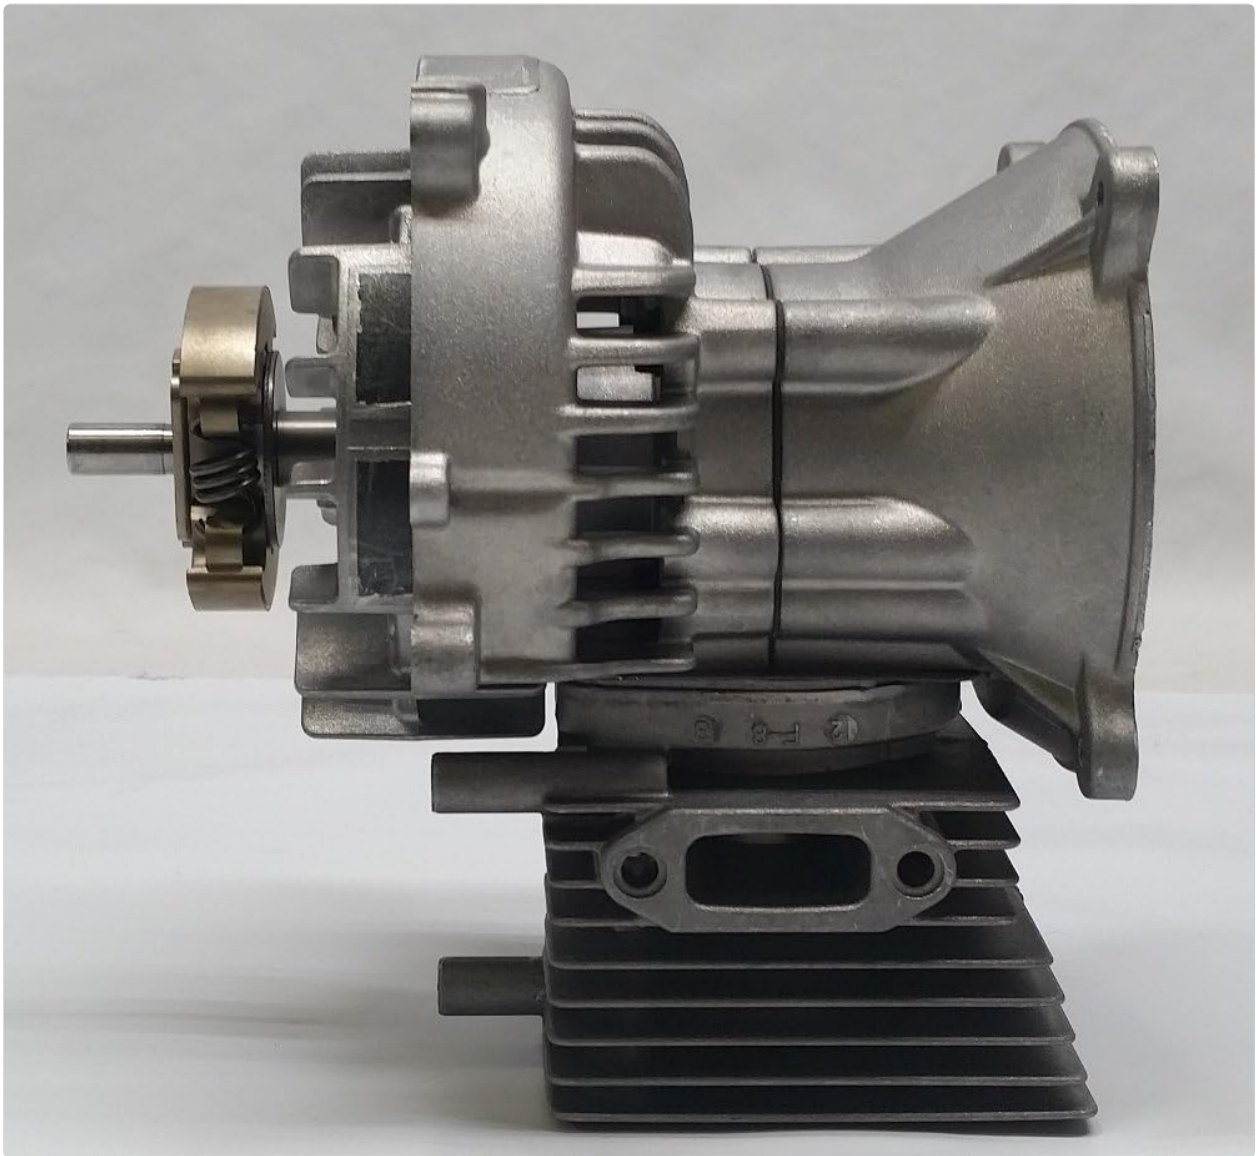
Side view of the MTD Line Trimmer Short Block, showing the cylinder cooling fins which are crucial for heat dissipation.
